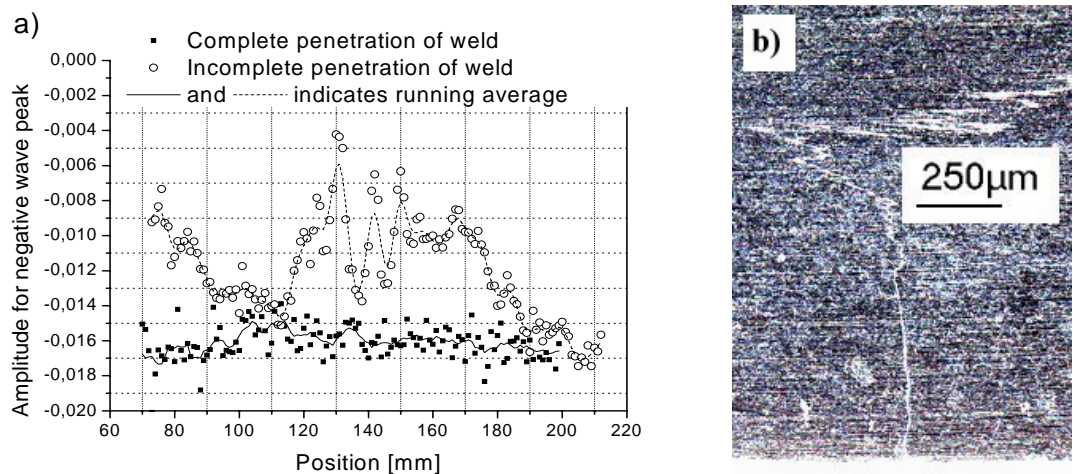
a) Amplitude of the negative peak of the Rayleigh waves from weld lines with complete and incomplete penetration. b) A picture of the cross section of the defective weld at 130mm.
